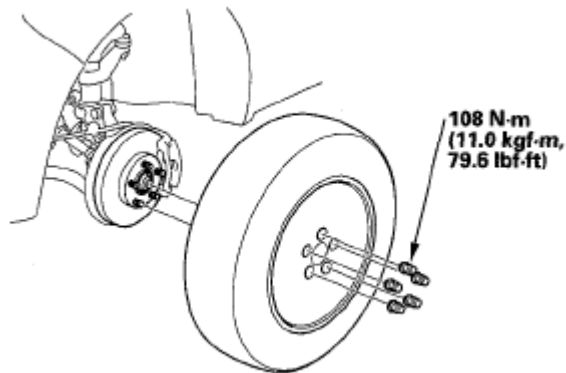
Identifying Front Wheel With Wheel Nuts With Torque Specification
